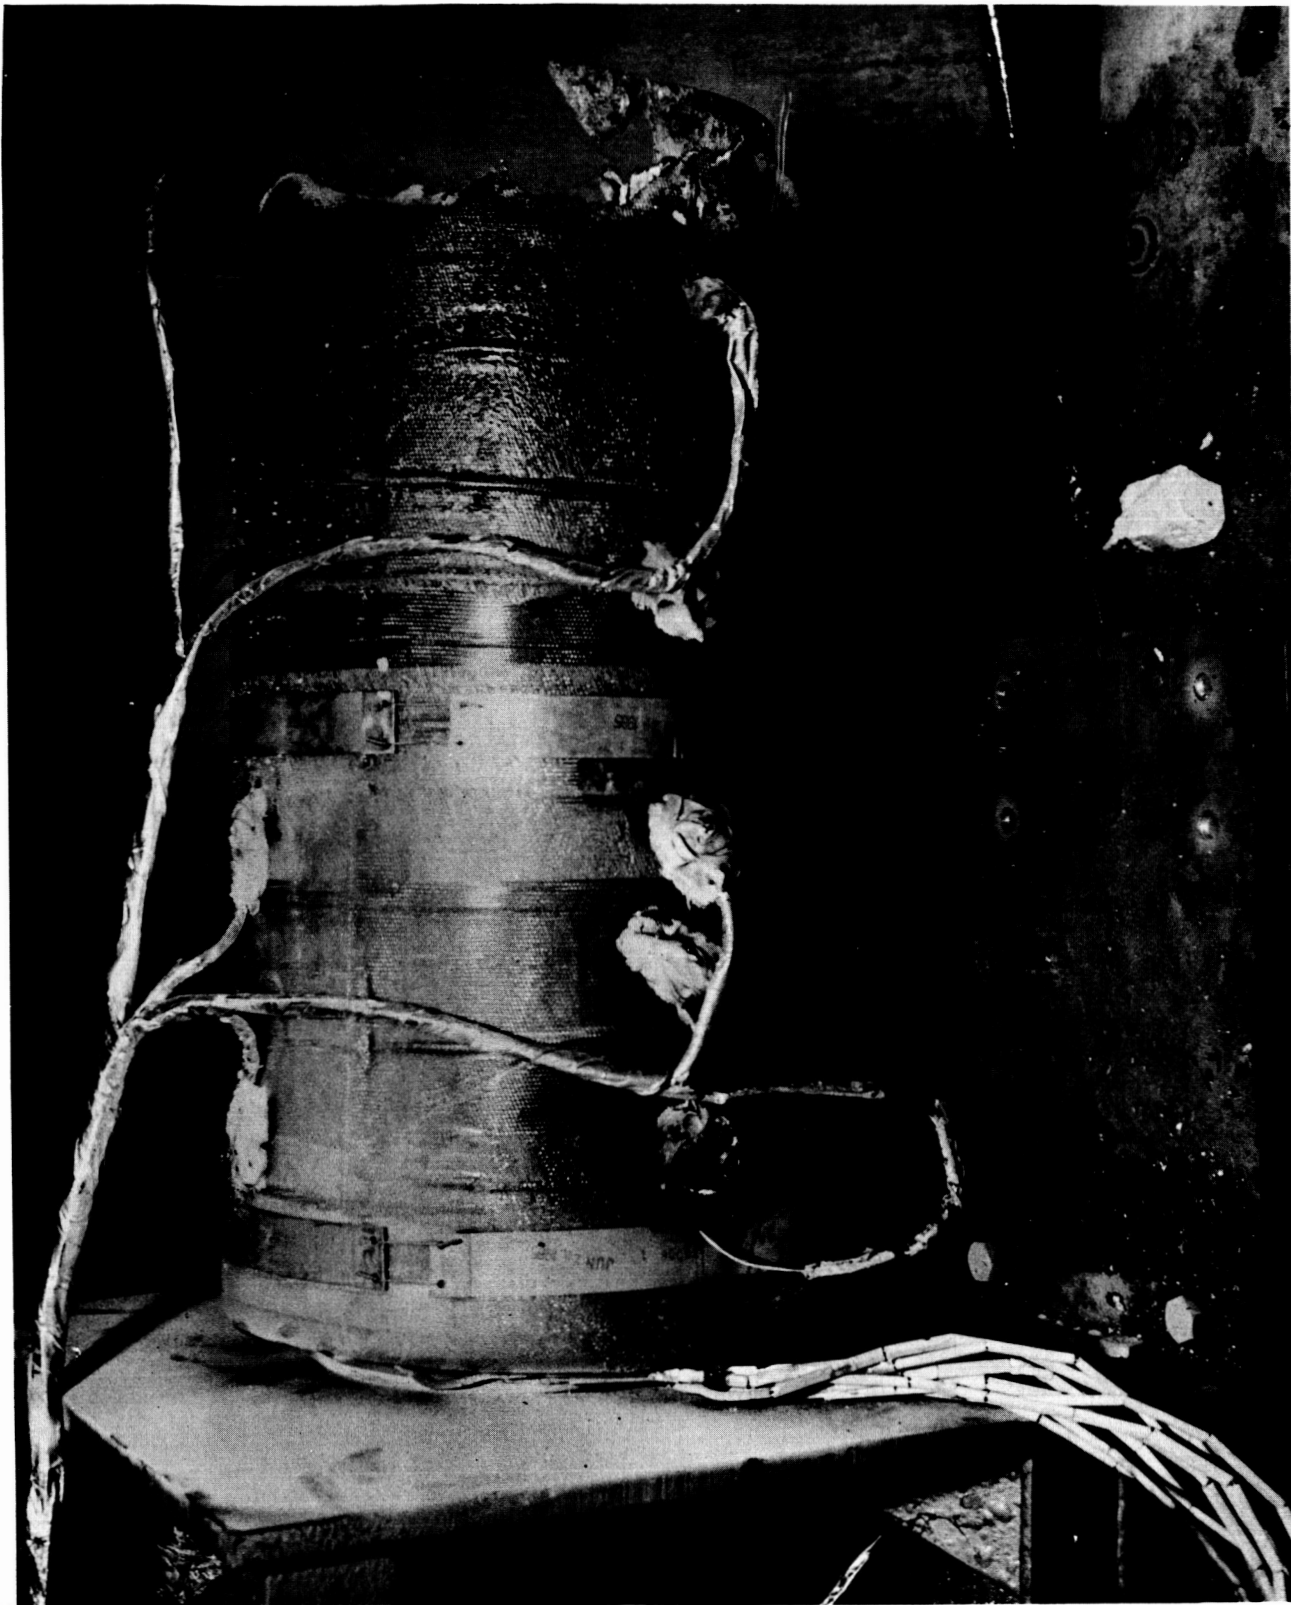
Engine Assembly S/N 2 After Fire Test
